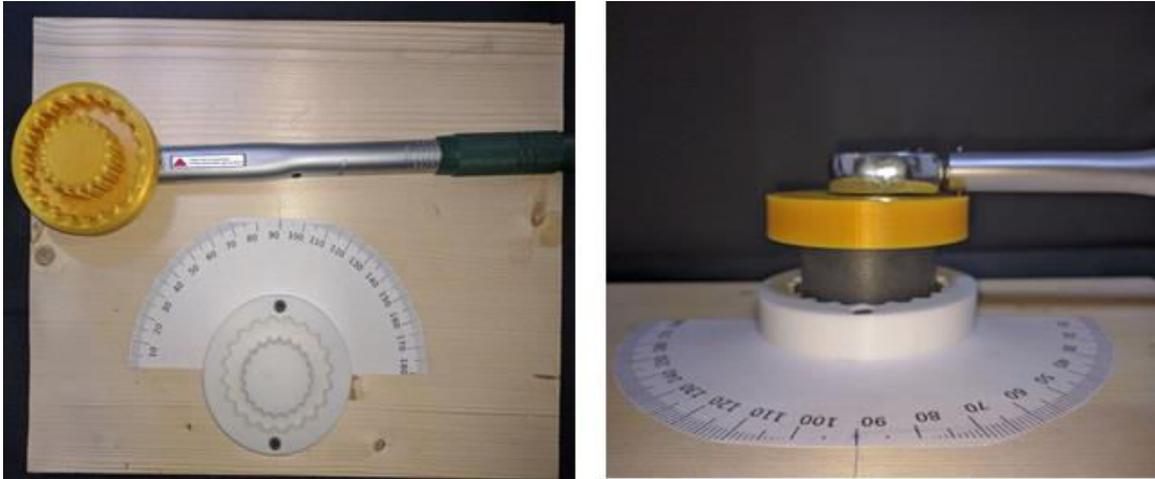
Scheme for testing a sample obtained by 3D printing and polymer casting.
